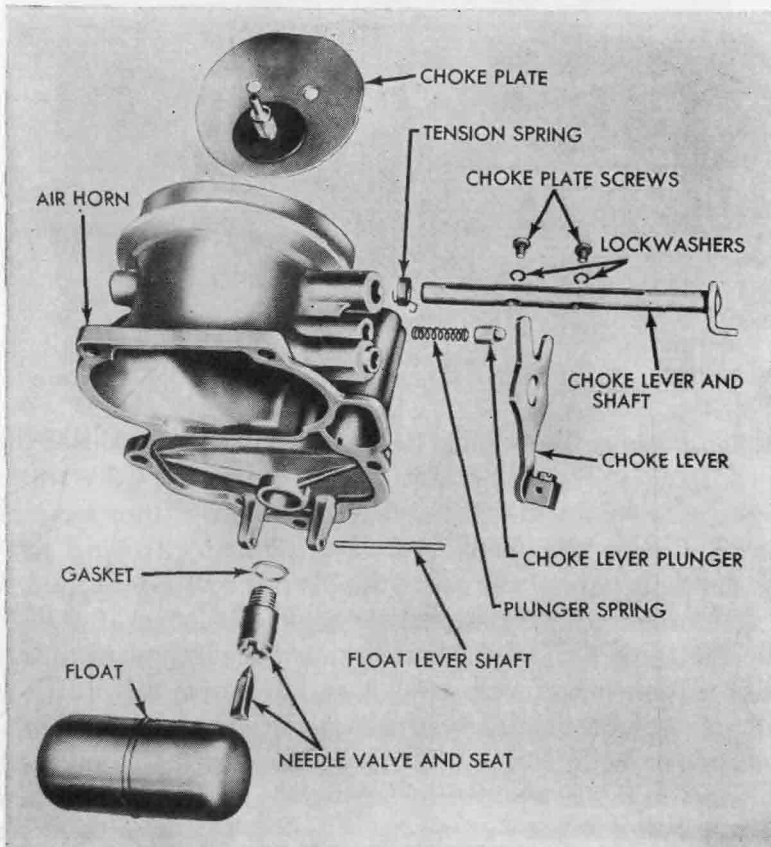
Carburetor air horn disassembled. (Ford Motor Company)
